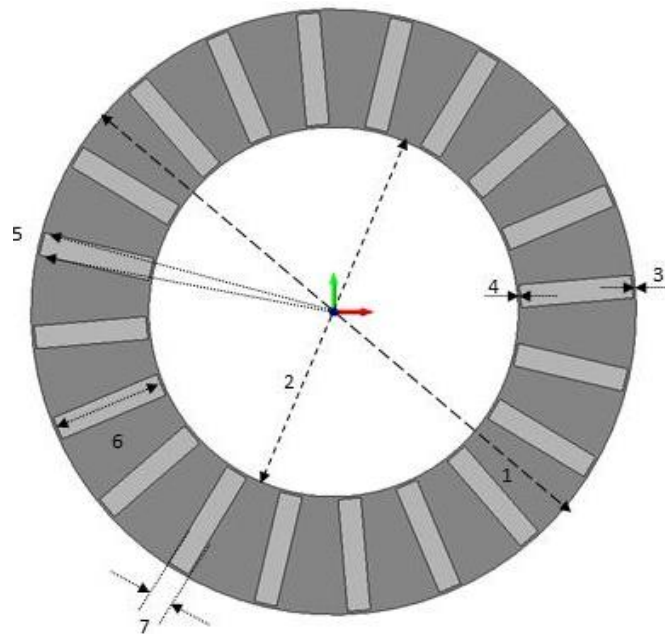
Outer Stator Dimensions of the STPM Machine.
